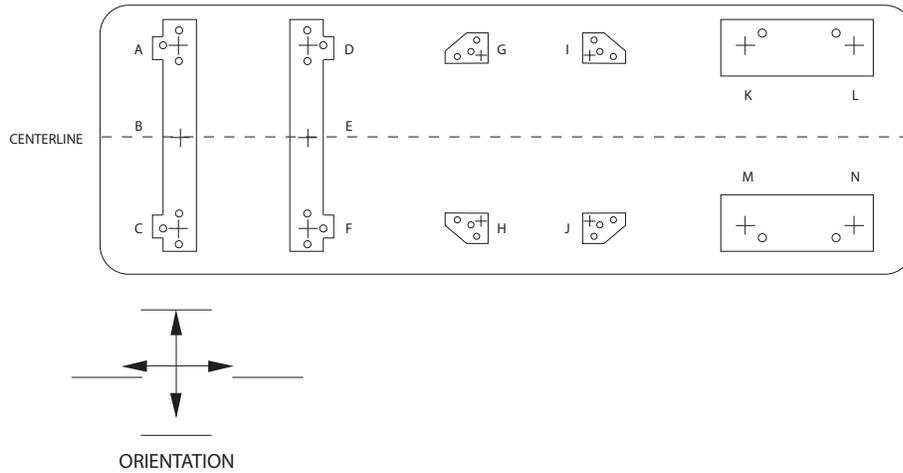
Typical Mounting Plate Layout for Elevation and Level Measurement
